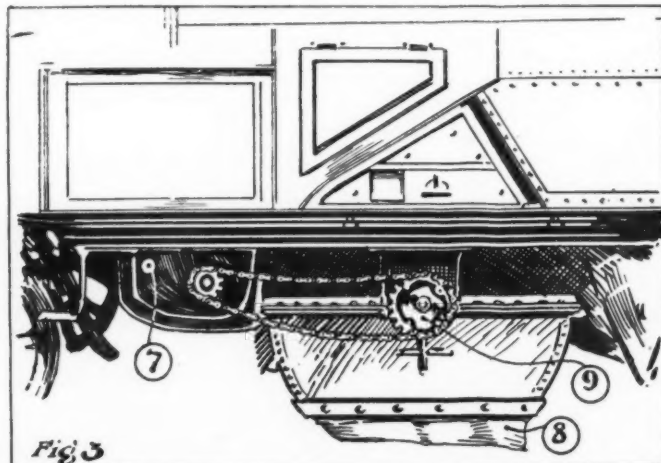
Left side view, front portion. 7—End of motor shaft, with starting clutch. 8—Leather flaps reaching to the ground to confine sweepings. 9—Chain for driving the brush; casing removed; to adjust brush diameter for wear, long-handled spanner is applied in 4 holes in rear sprocket to turn shaft
